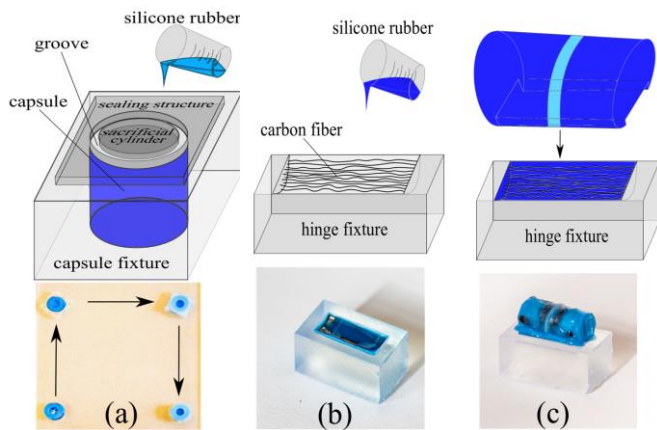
(a) The four-stage process of sealing mechanism preparation, (b) mounting of carbon fiber in the hinge fixture and pouring of silicone rubber, and (c) mounting of the capsule in the hinge structure and curing of the hinge.
